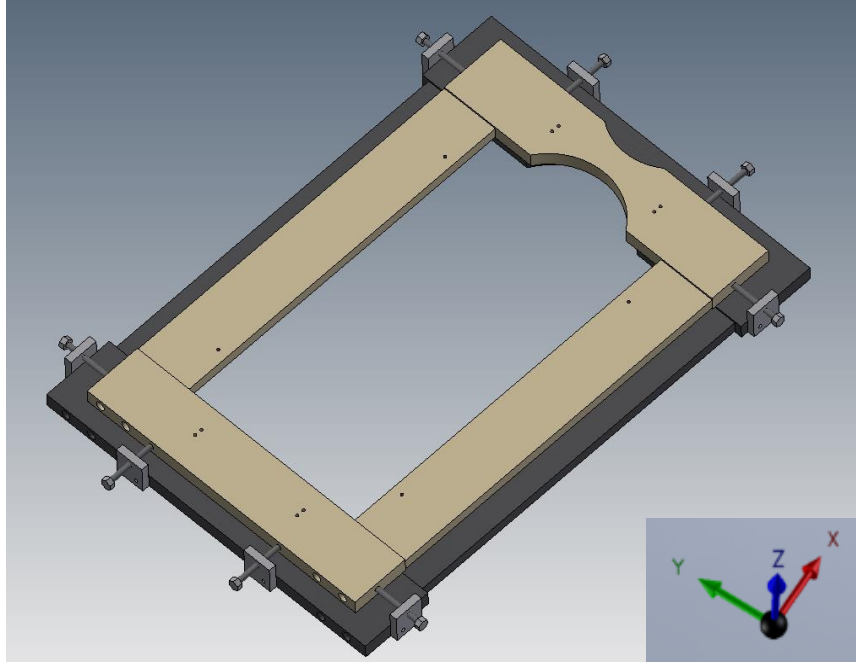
Isometric view of the two layer sliding plates. The x-axis points along beam axis and z-axis points vertically. Movement of upper plate is in x-y plane.
